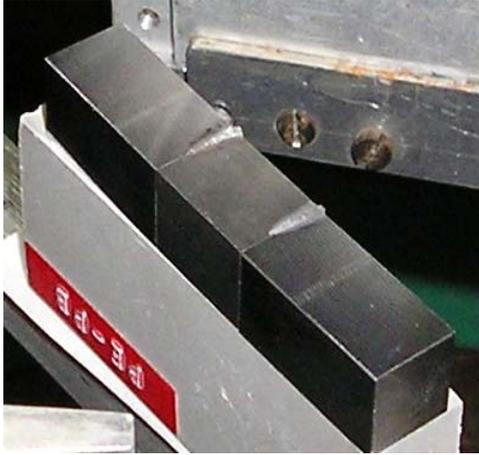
Photo of one of the specimens with the weld on one side.
